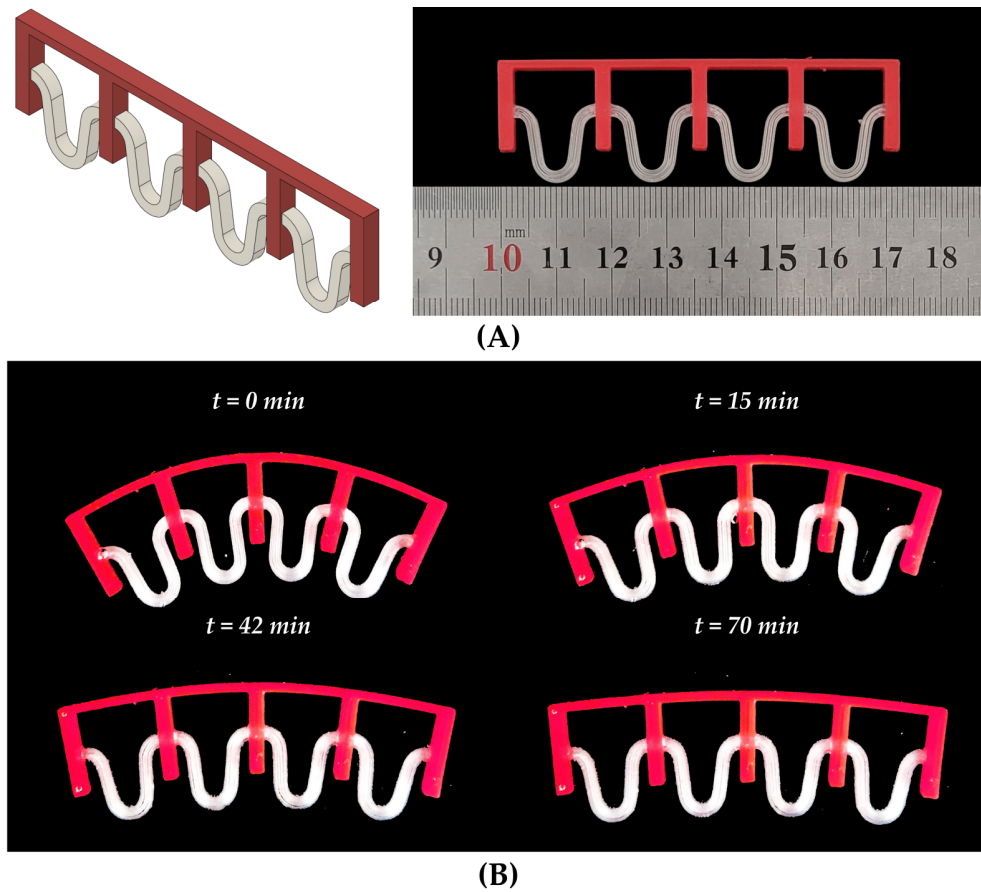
(A) CAD models & prototypes and (B) shape-morphing test for actuator 32.
